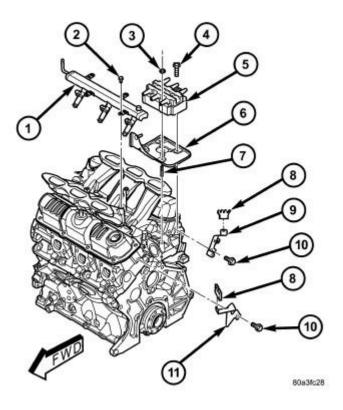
Removing/Installing Ignition Coil & Bracket Courtesy of CHRYSLER LLC
